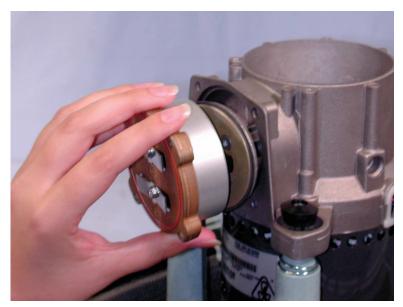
FIGURE I: REMOVING THE VALVE PLATE AND CYLINDER SLEEVE
